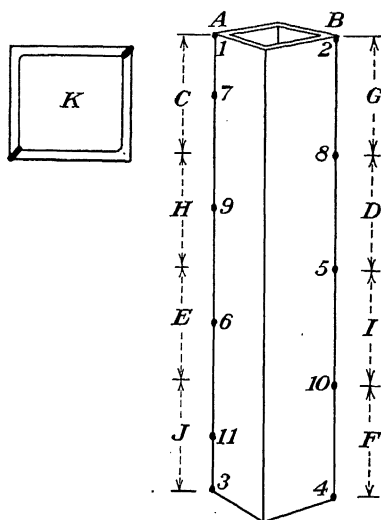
K. End view of angle irons tacked together to form box. Numbers indicate order of tack welds. Letters indicate order of weld deposits.
